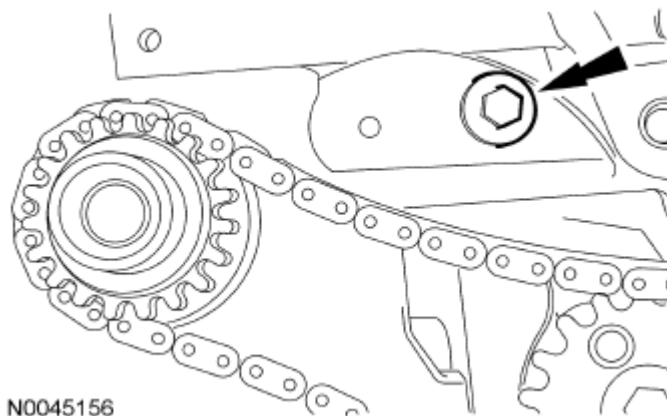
Locating Oil Pump Drive Chain Tensioner Shoulder Bolt
